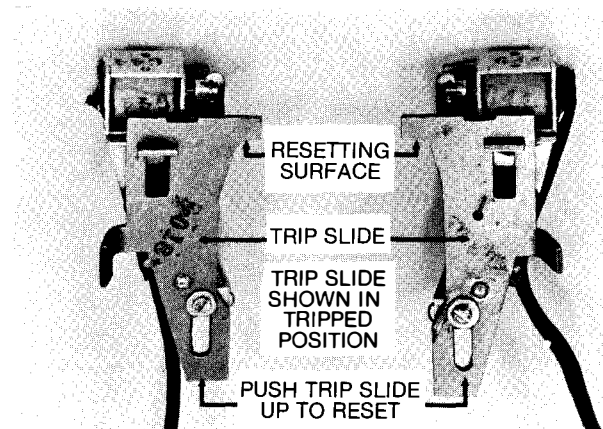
L Shunt Trip Device—Left Side Mounted. Figure 26-R Shunt Trip Device—Right Side Mounted.
